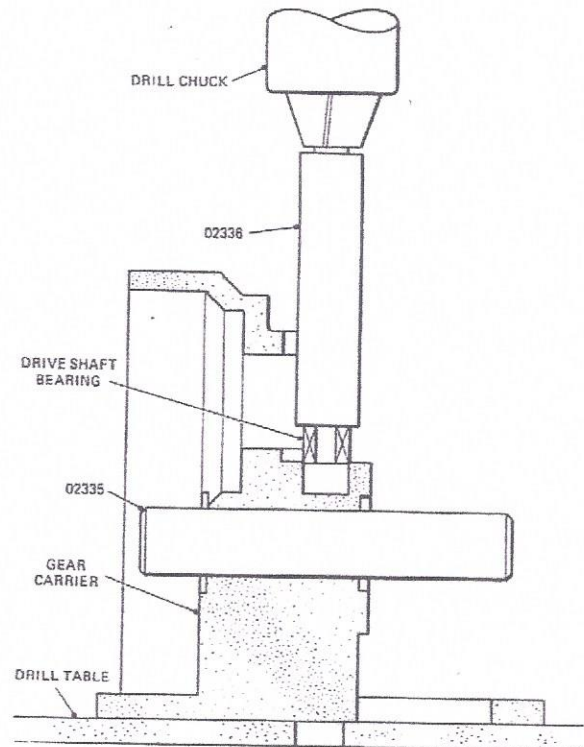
(b) Insertion of the Drive Shaft Bearing into the Gear Carrier
